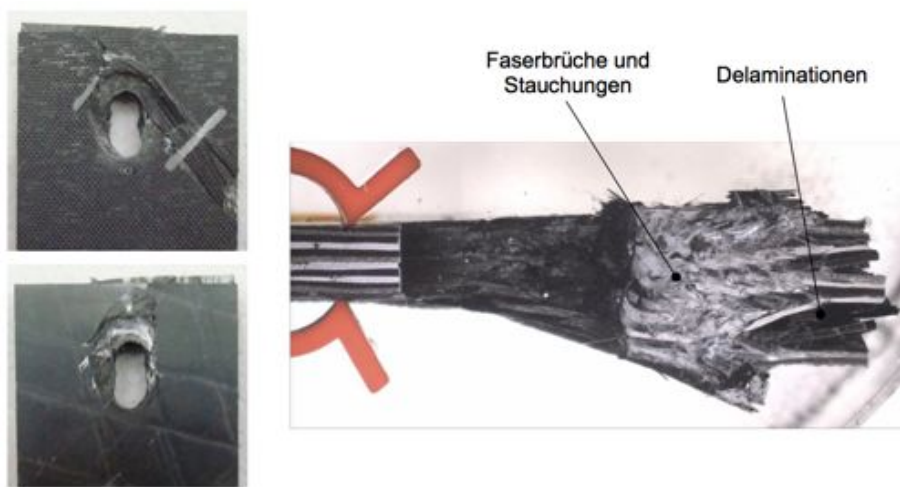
Bearing failure in QI laminate: front, back and side view, damage and failure [5]
